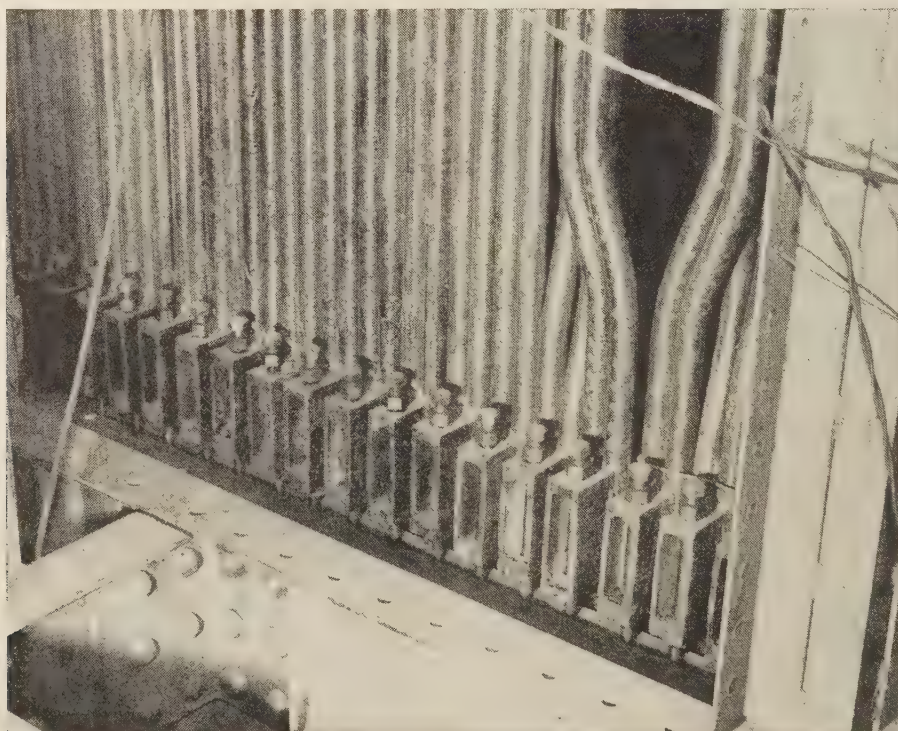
FURNACE-TUBE SUPPORTING FIXTURES
